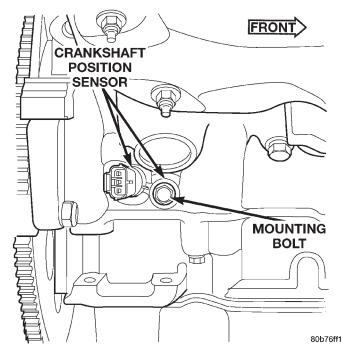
CKP Sensor Removal/Installation—4.7L V–8 Engine
